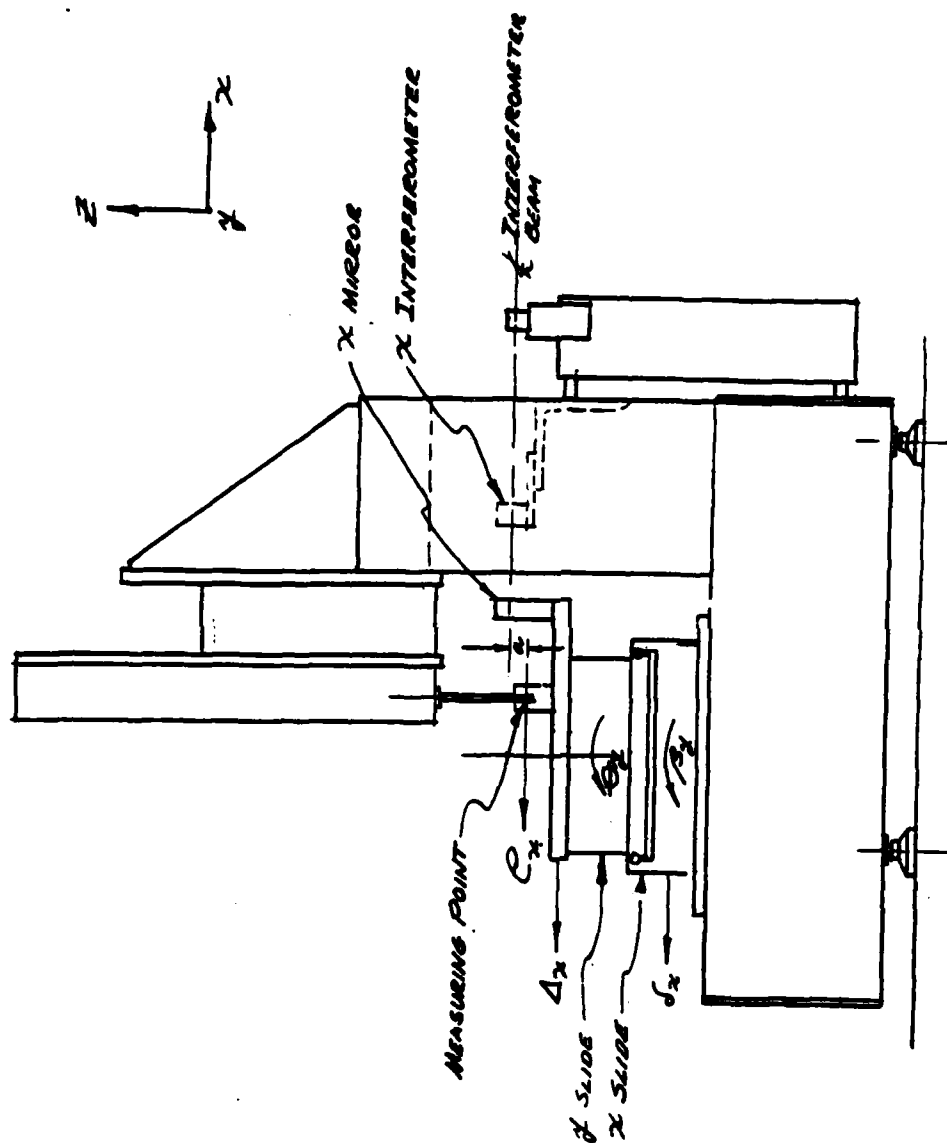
Side View -- AGTCMD Geometric Machine Errors
